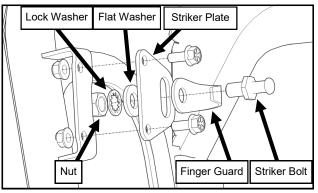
B (Door Striker INSIDE for PC Cab)
